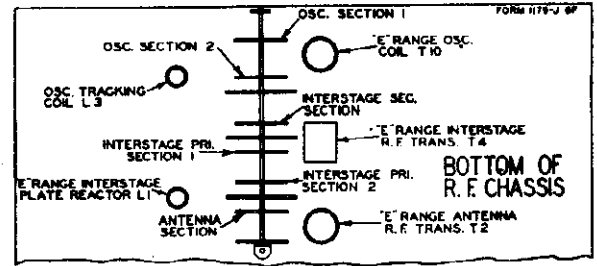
Bottom View of Chassis Showing Coil and Switch Section Location
